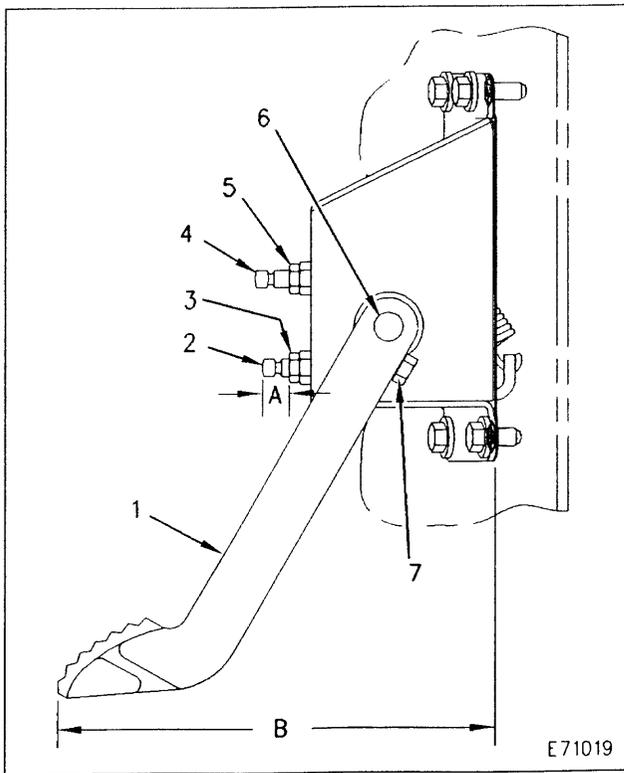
Decelerator adjustment for machine with HEUI engine.
